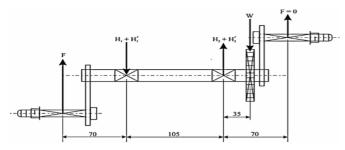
Forces activated on the crank shaft  $F_{1\&2}$  – impact load,  $H_{1\&2}$  – reactions on bearings due to impact load,  $H^\prime_{1\&2}$  – reactions on bearings due to chain drive and W – load on the chain drive.
